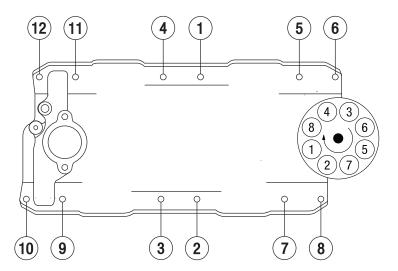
Small-Block Chevrolet Bolt Torque Sequence
